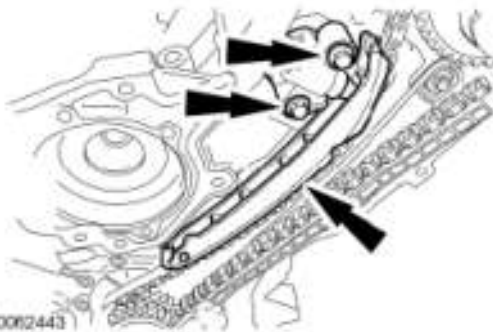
Locating Bolts And LH Timing Chain Tensioner
